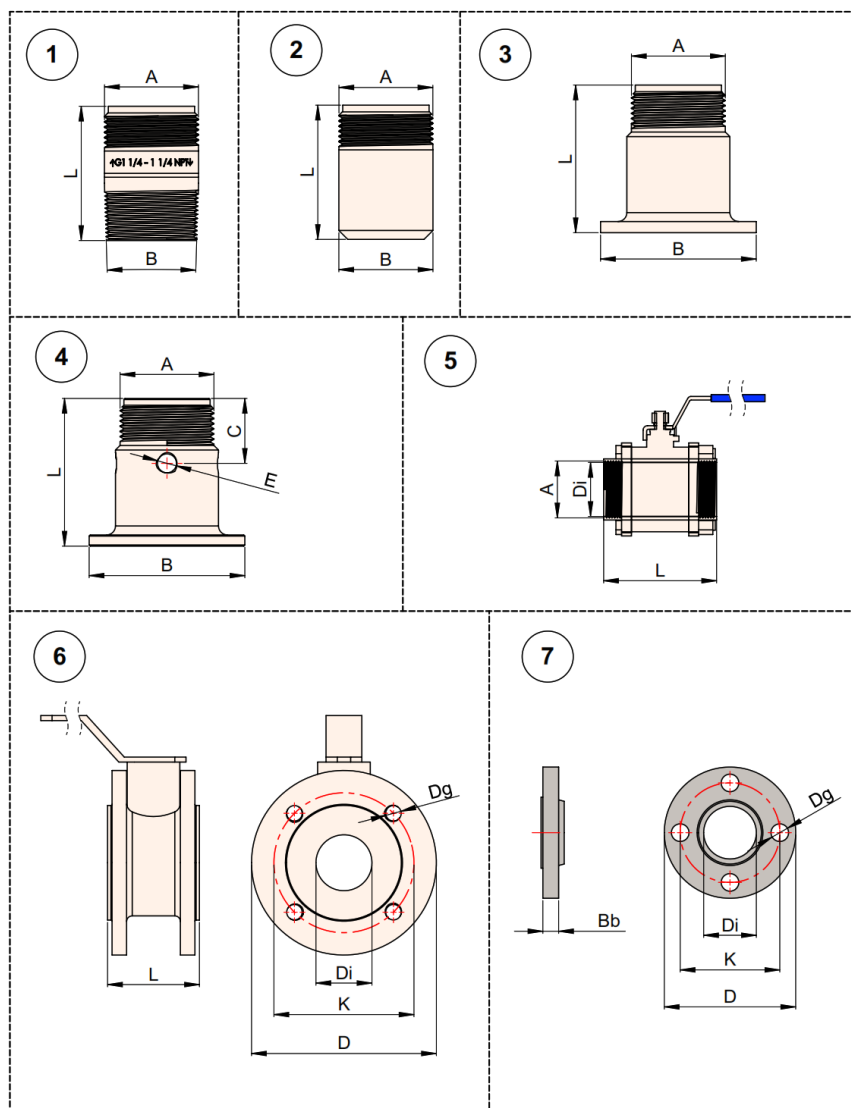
Dimensional drawing PR10 options - refer to tabels 4 and 5 on next page
